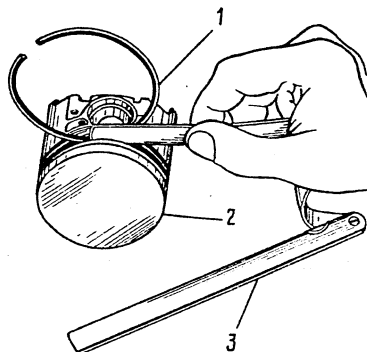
Checking the Piston Ring Side Clearance:
